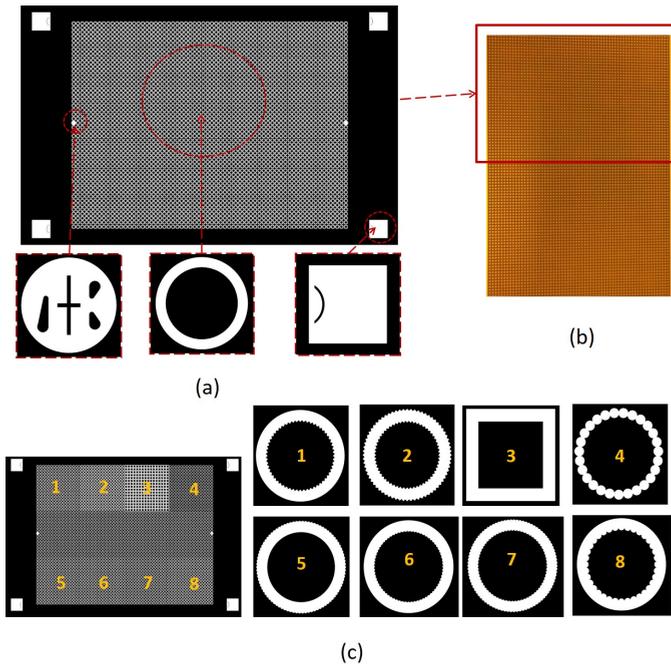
The Mask design used in the TPVH-N-PCB process. (a) Mask design of identical SU-8 rings (bottom middle), first-level alignment markers (bottom left) and second-level alignment markers (bottom right). (b) The mask covers half of the PCB substrate. (c) Special mask designs containing 7 different ring patterns with side wall features and a square pattern.
